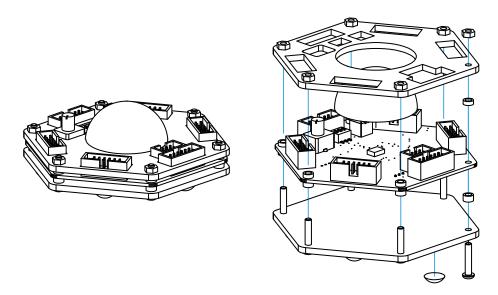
CAD drawing of a TN node, in assembled and exploded states.
